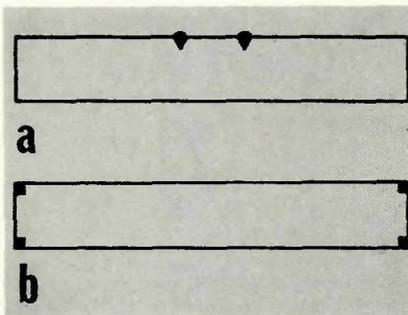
Center and edge welded plates, simulating (a) the flange and (b) the web of a welded built-up wide-flange shape
